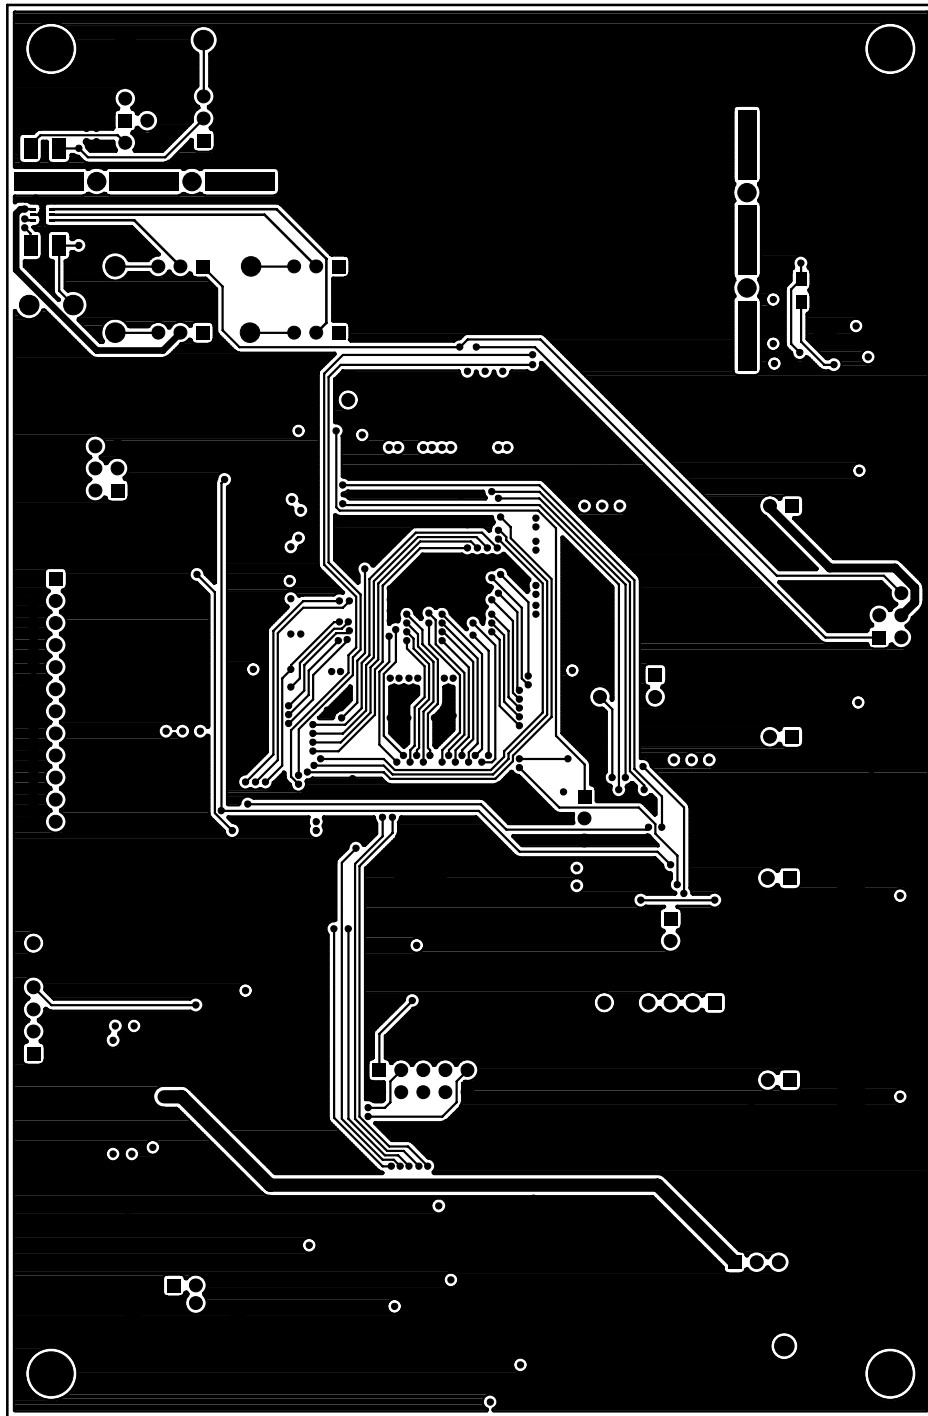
MAX44000 EV Kit PCB Layout—Component Side
